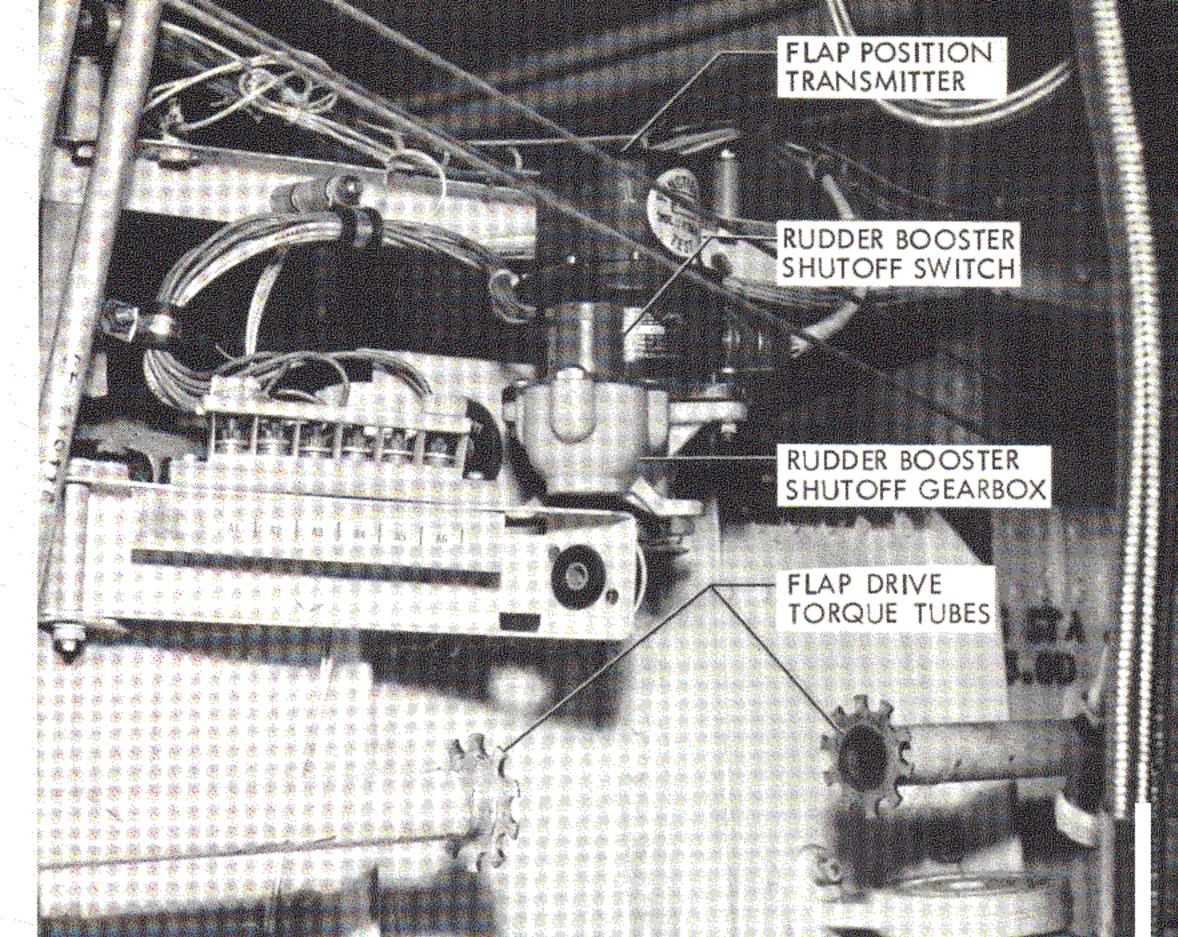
Flap Position Transmitter Mounted on Rudder Booster Shutoff Gearbox in Hydraulic Service Center — Flap Drive Unit Installation Not Shown
